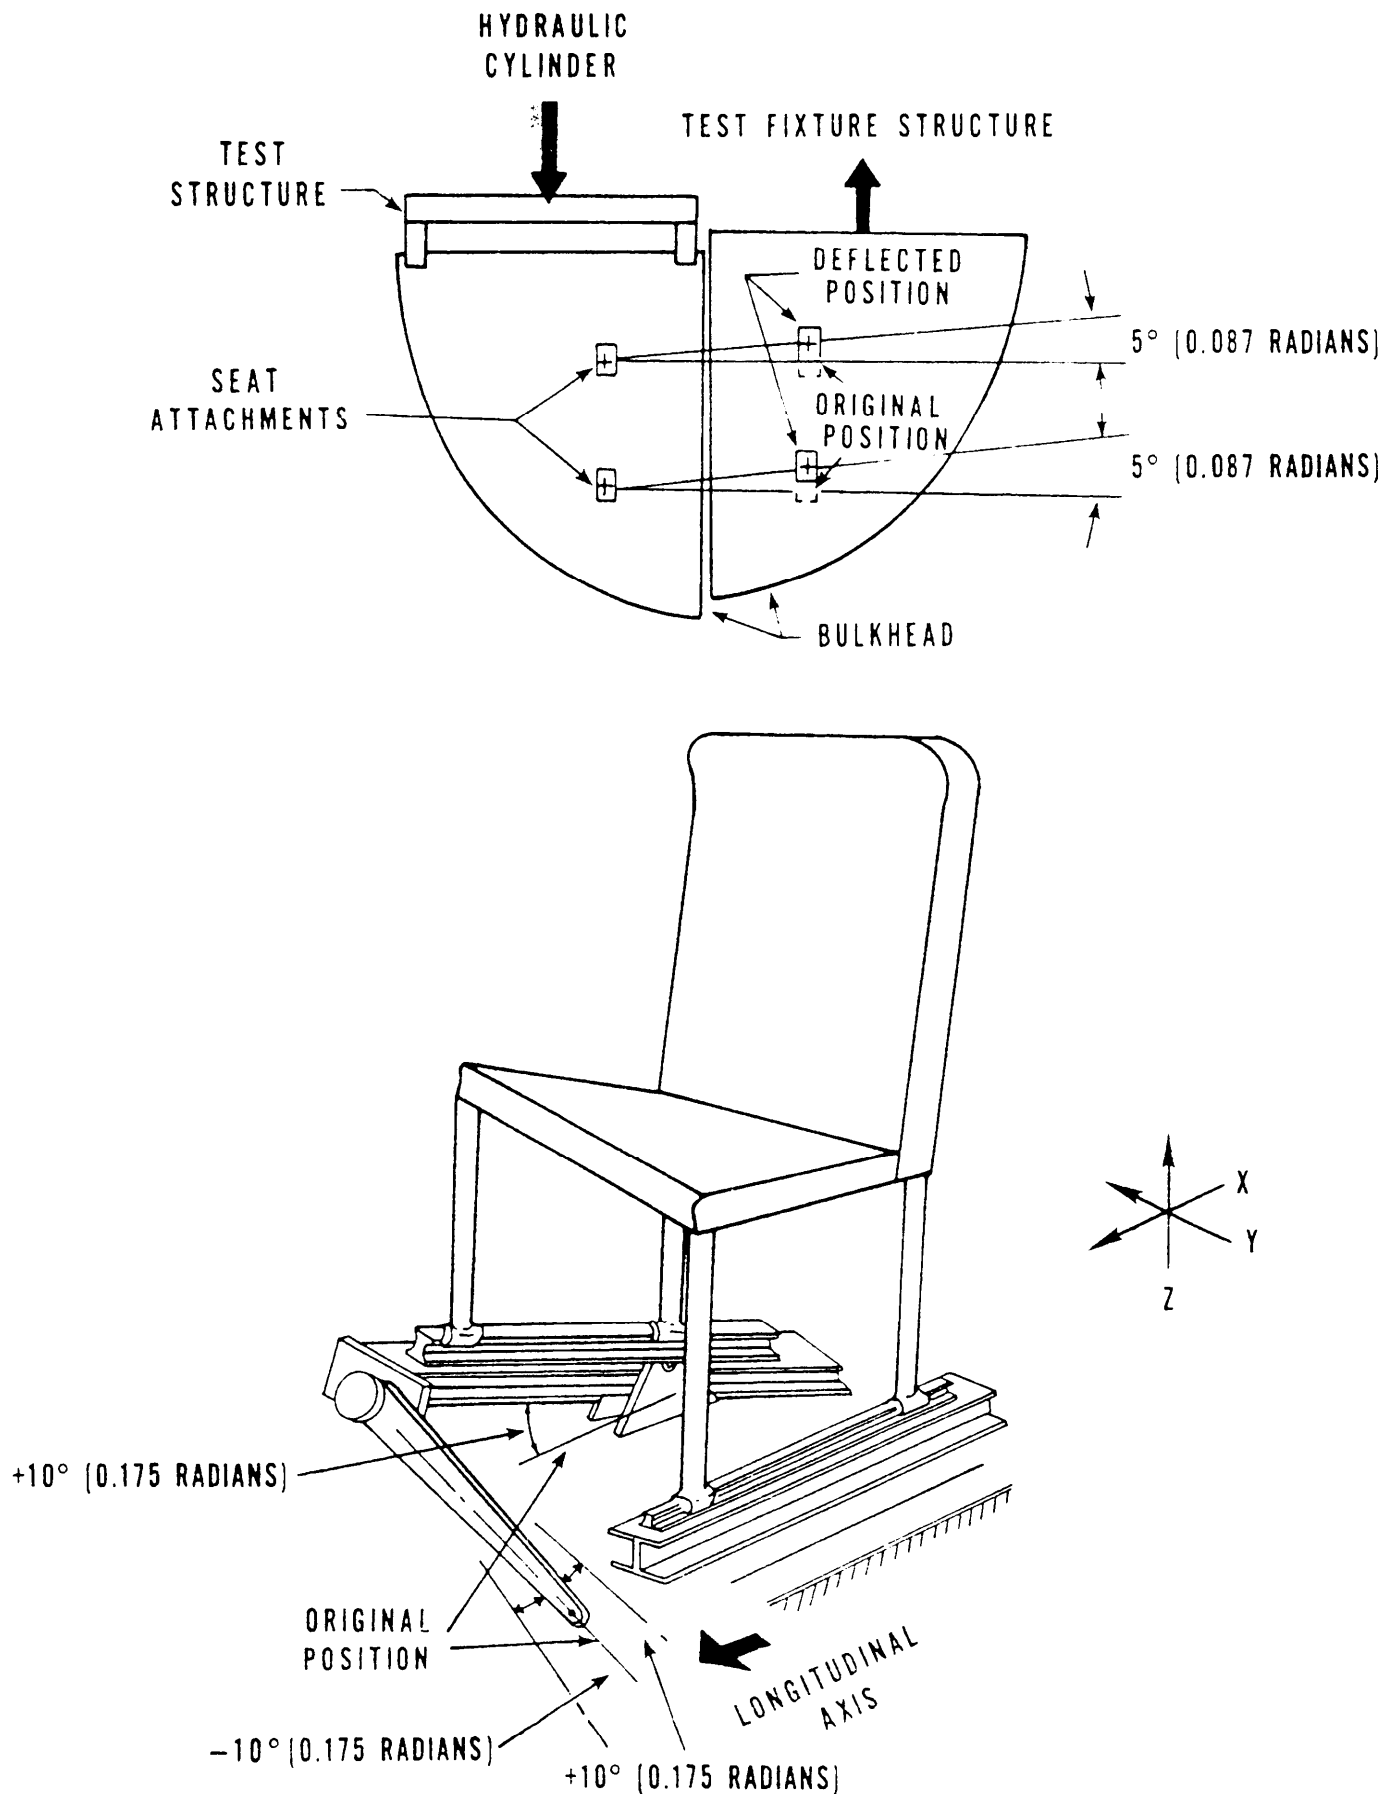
Floor or bulkhead warpage requirement for static loading of seat(s).
